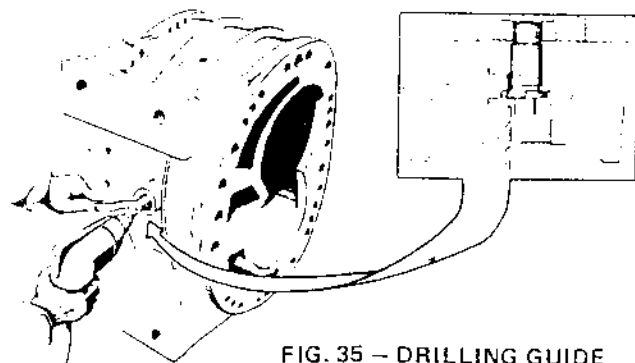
DRILLING GUIDE BLOCK SPINDLE
